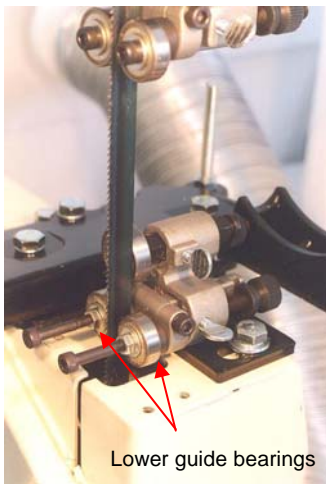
Lower blade guide (saw table and deflecting plates removed)
